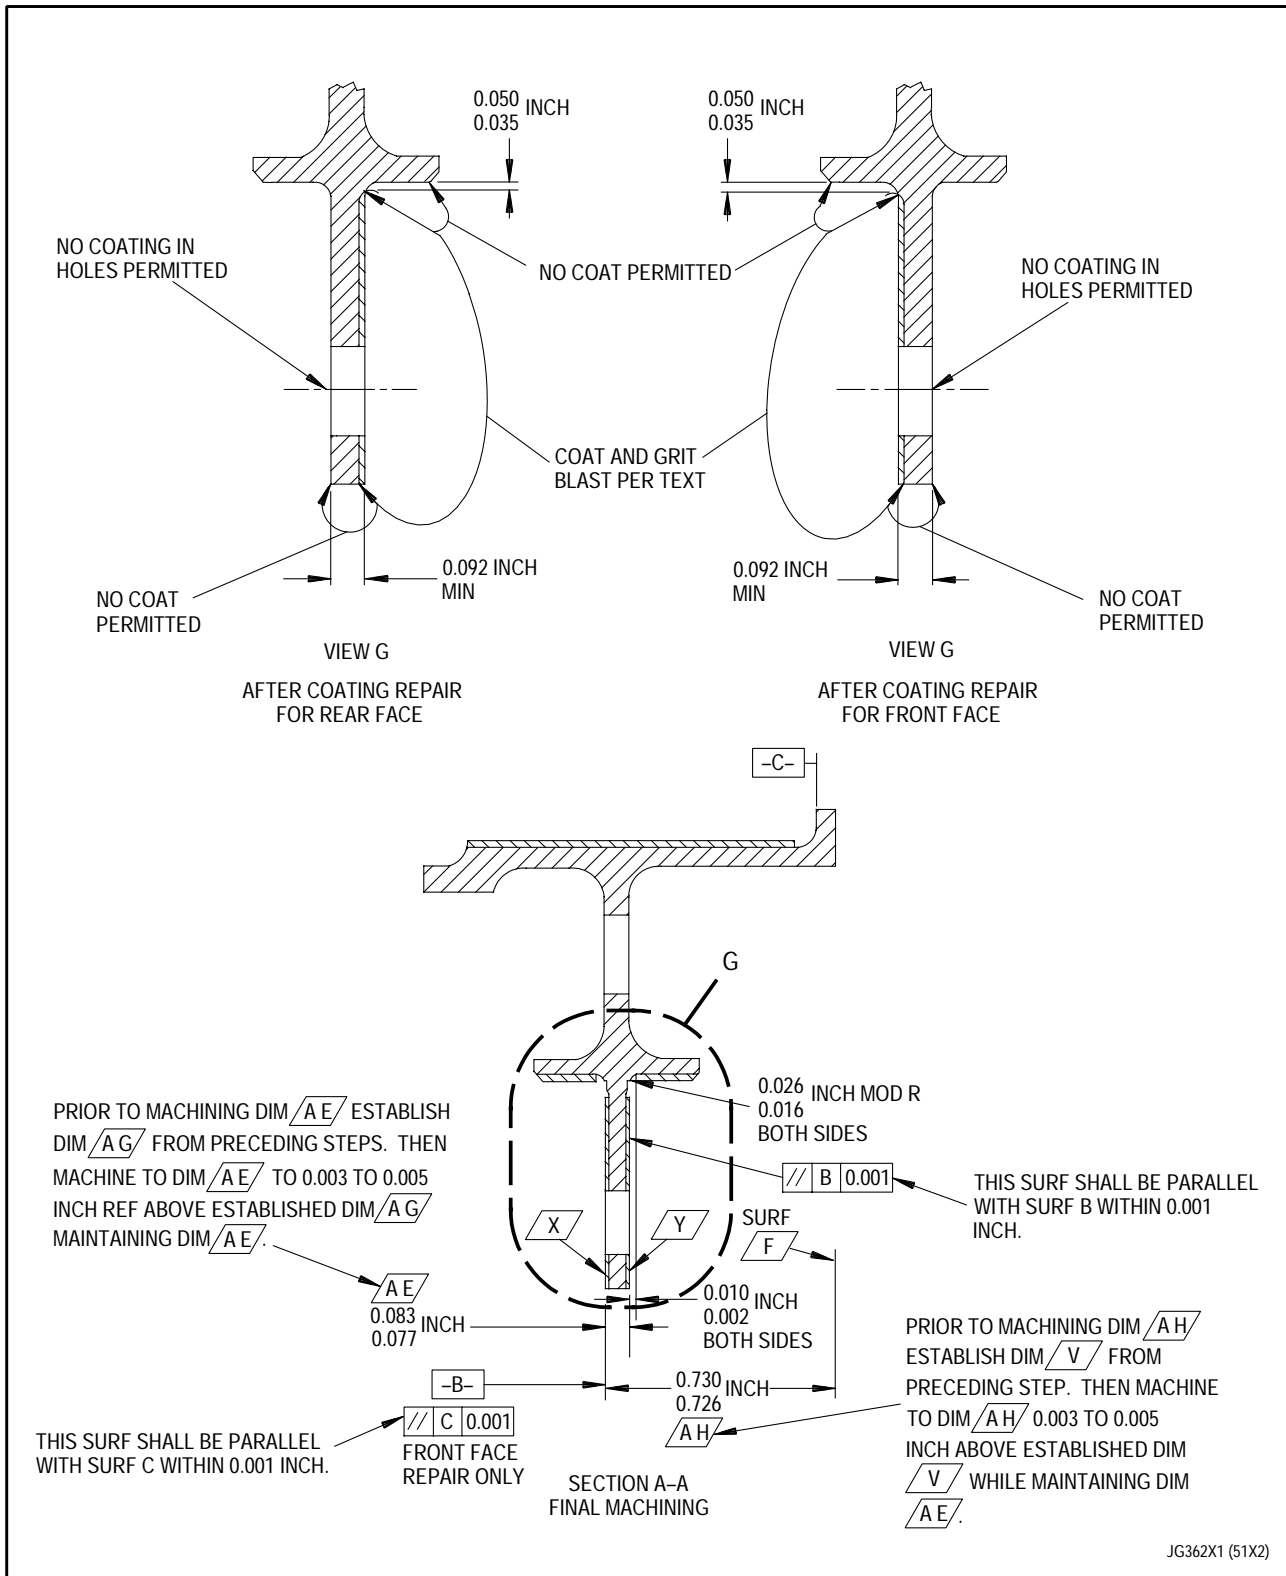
No. 4 Bearing Housing - Front and Rear Flange Face Repair (Sheet 2 of 2)
